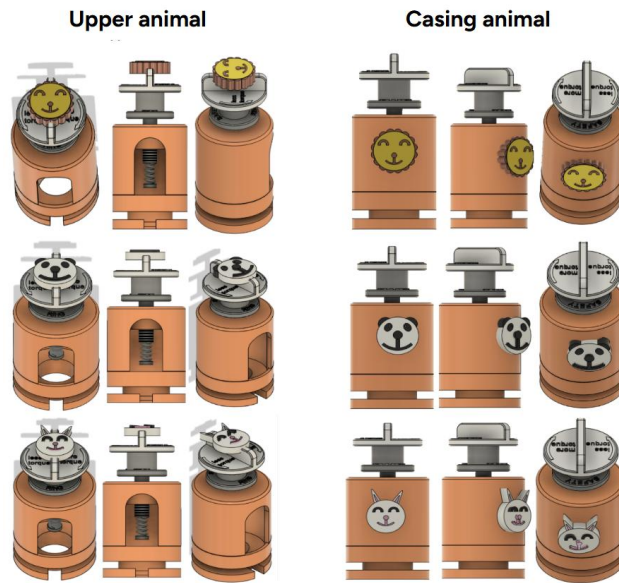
Different views of rejected designs of the infant-friendly support to the spring-loaded mechanism. Two design strategies were explored to incorporate decorative animal elements on the mechanism but were ultimately rejected in favor of a lighter alternative.
